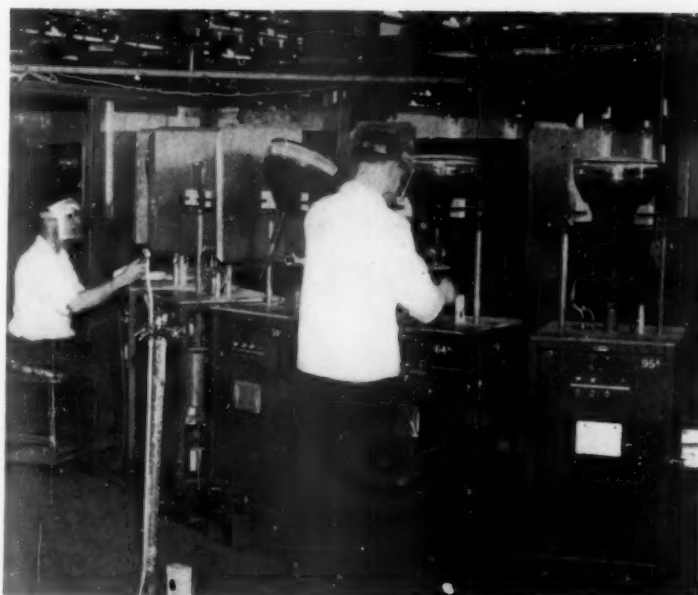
Inline exhaust machine loading tubes for exhausting. Sealing base of tube after exhausting. Employees wear full face and eye protection.
